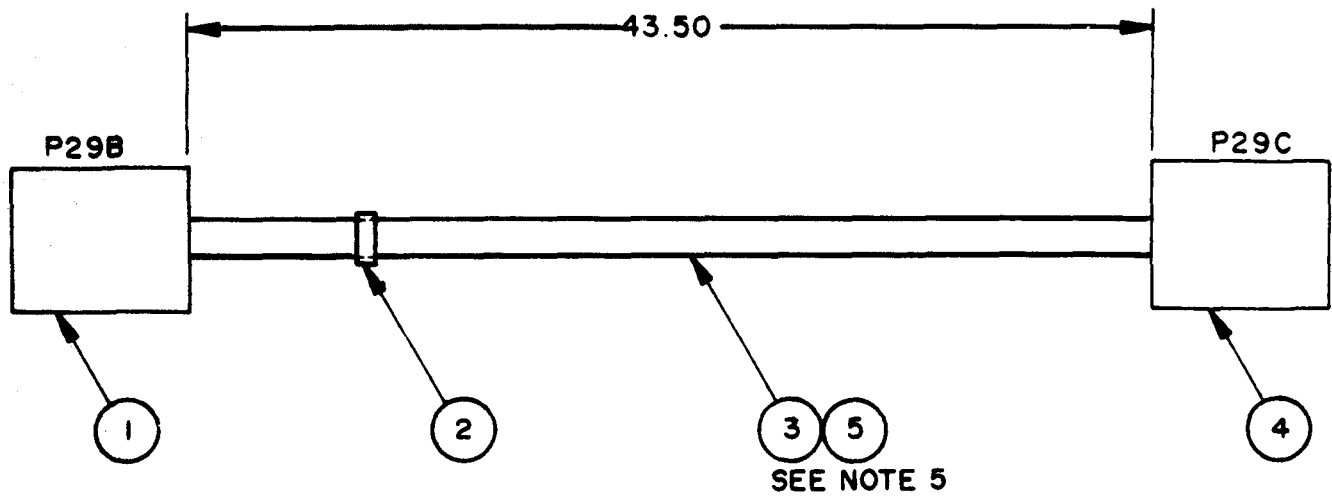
Fabrication of Remote Functions Box Assembly to Connector Panel Wiring Harness (Sheet 1 of 2)
